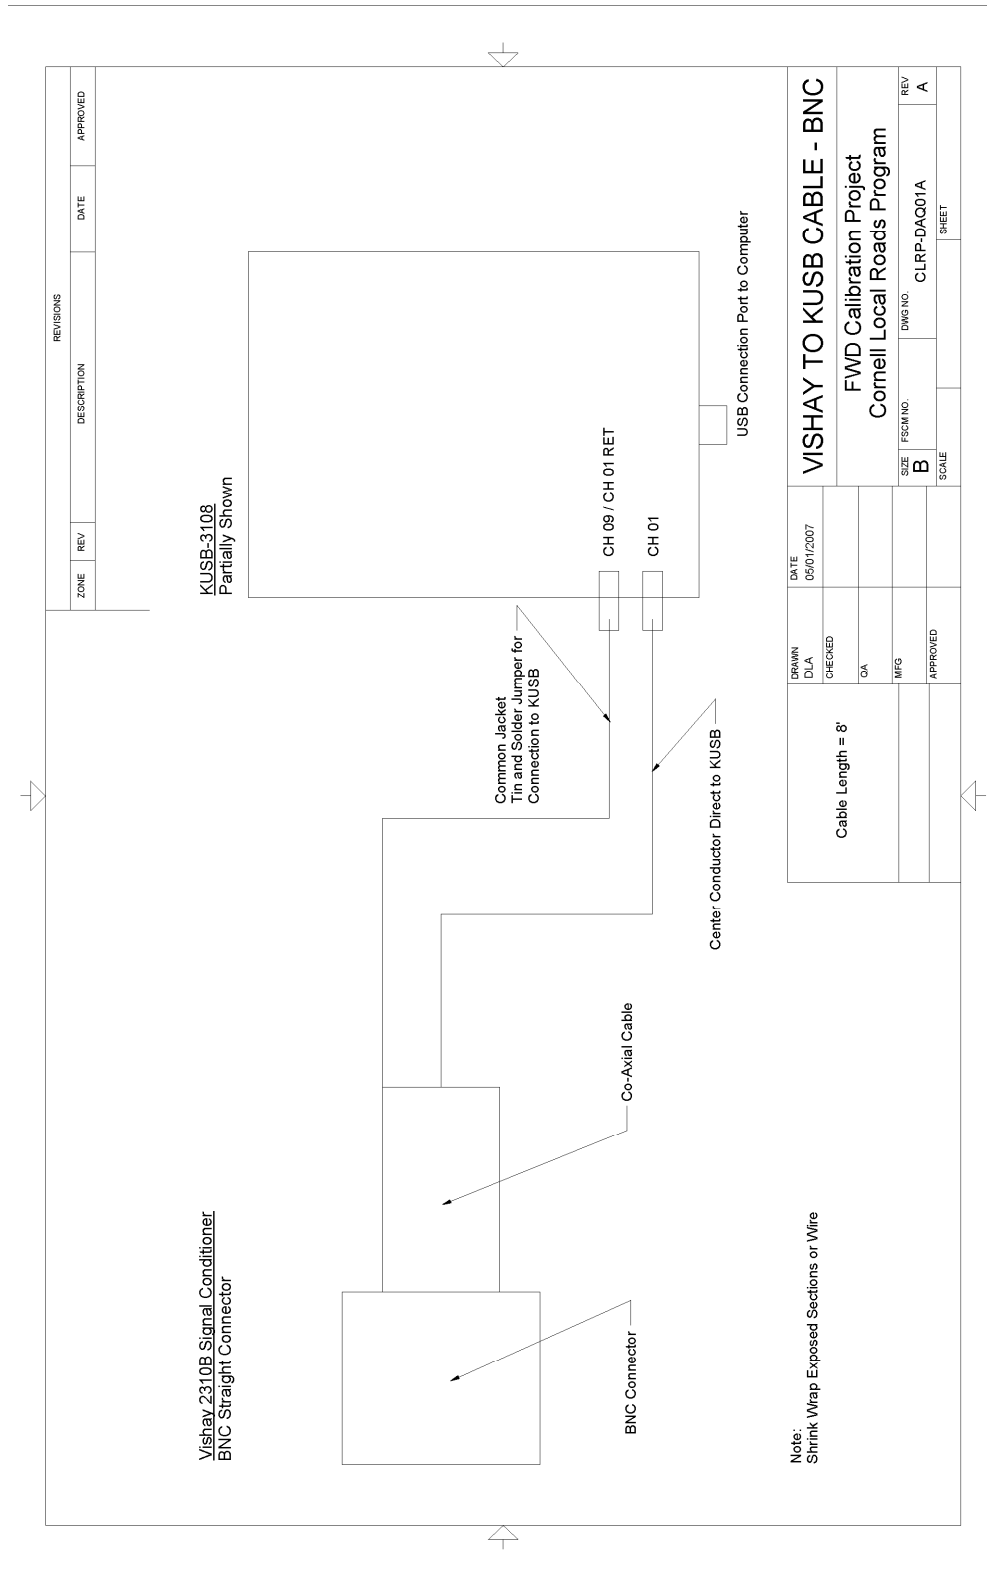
Drawing. CLRP-DAQ01A Vishay 2310B BNC to DAQ Cable.
